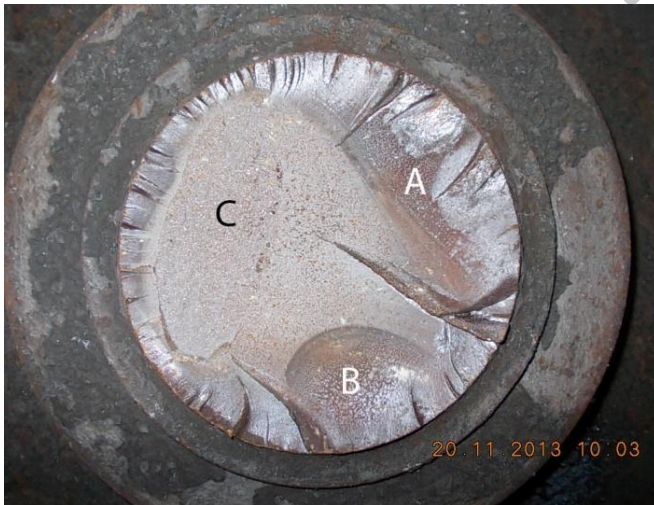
Appearance of the fracture surface with zones characterized by certain types of fracture
